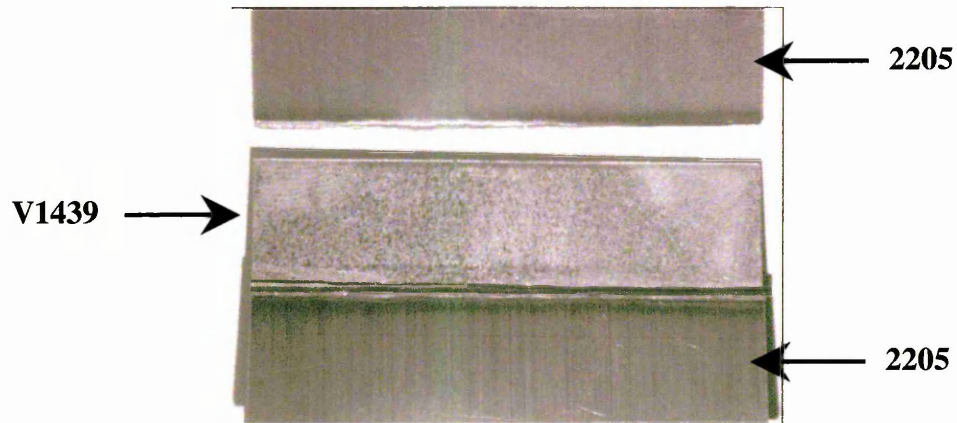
Shows a fatigue specimen in which fatigue failure occurred in the 2205
